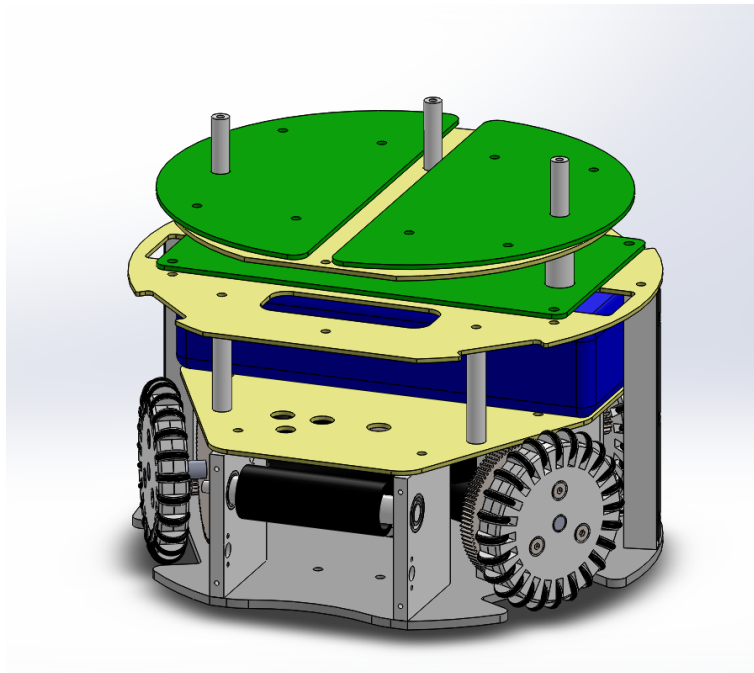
Internal mechanical assembly of the 2020 Warthog Robotics SSL robot.
